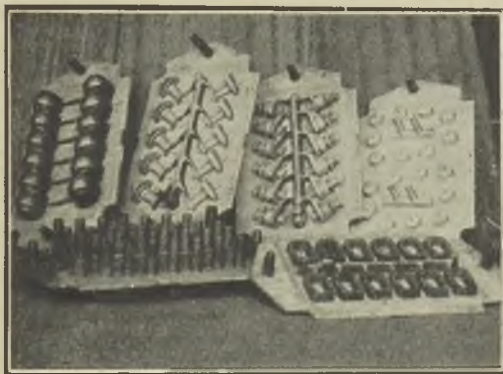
SIX GOOD EXAMPLES OF MACHINE PATTERN PLATES FOR ENGINE DETAILS. NOTE THE PLATE IN LEFT FOREGROUND WITH 30 VALVE GUIDES IN AN 18-IN. × 12-IN. BOX.
